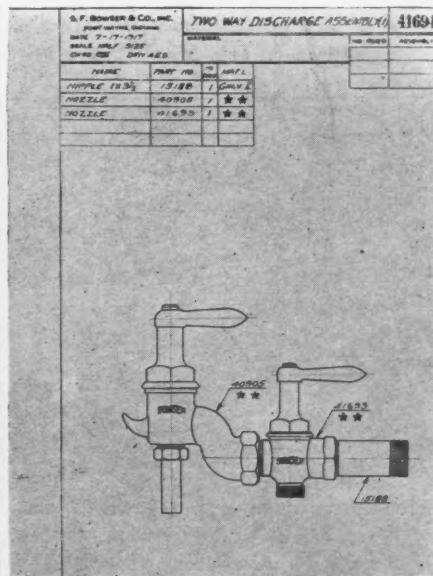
Method of indicating "Partial Assemblies" in Bills of Material on Assembly Drawings
